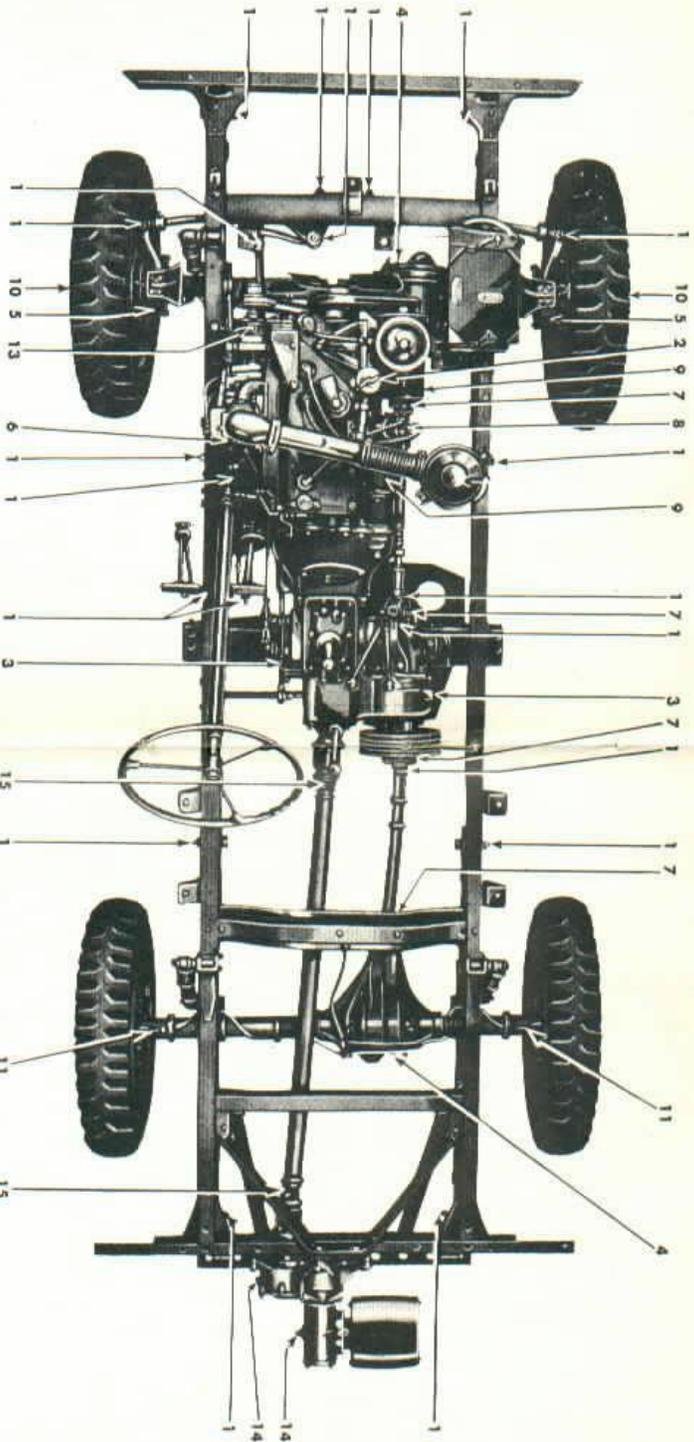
CHASSIS, SHOWING PARTS REQUIRING LUBRICATION
